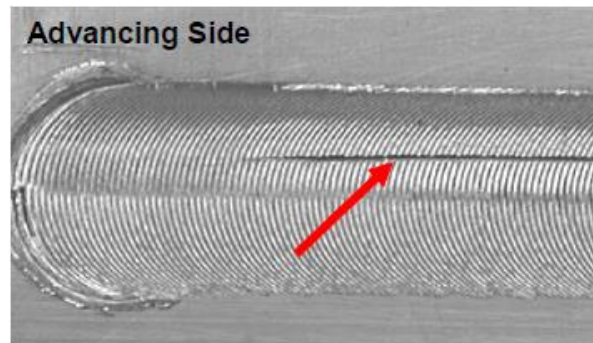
Weld with a surface lake of fill defect. ([Mishra and Mahoney, 2007](#))
